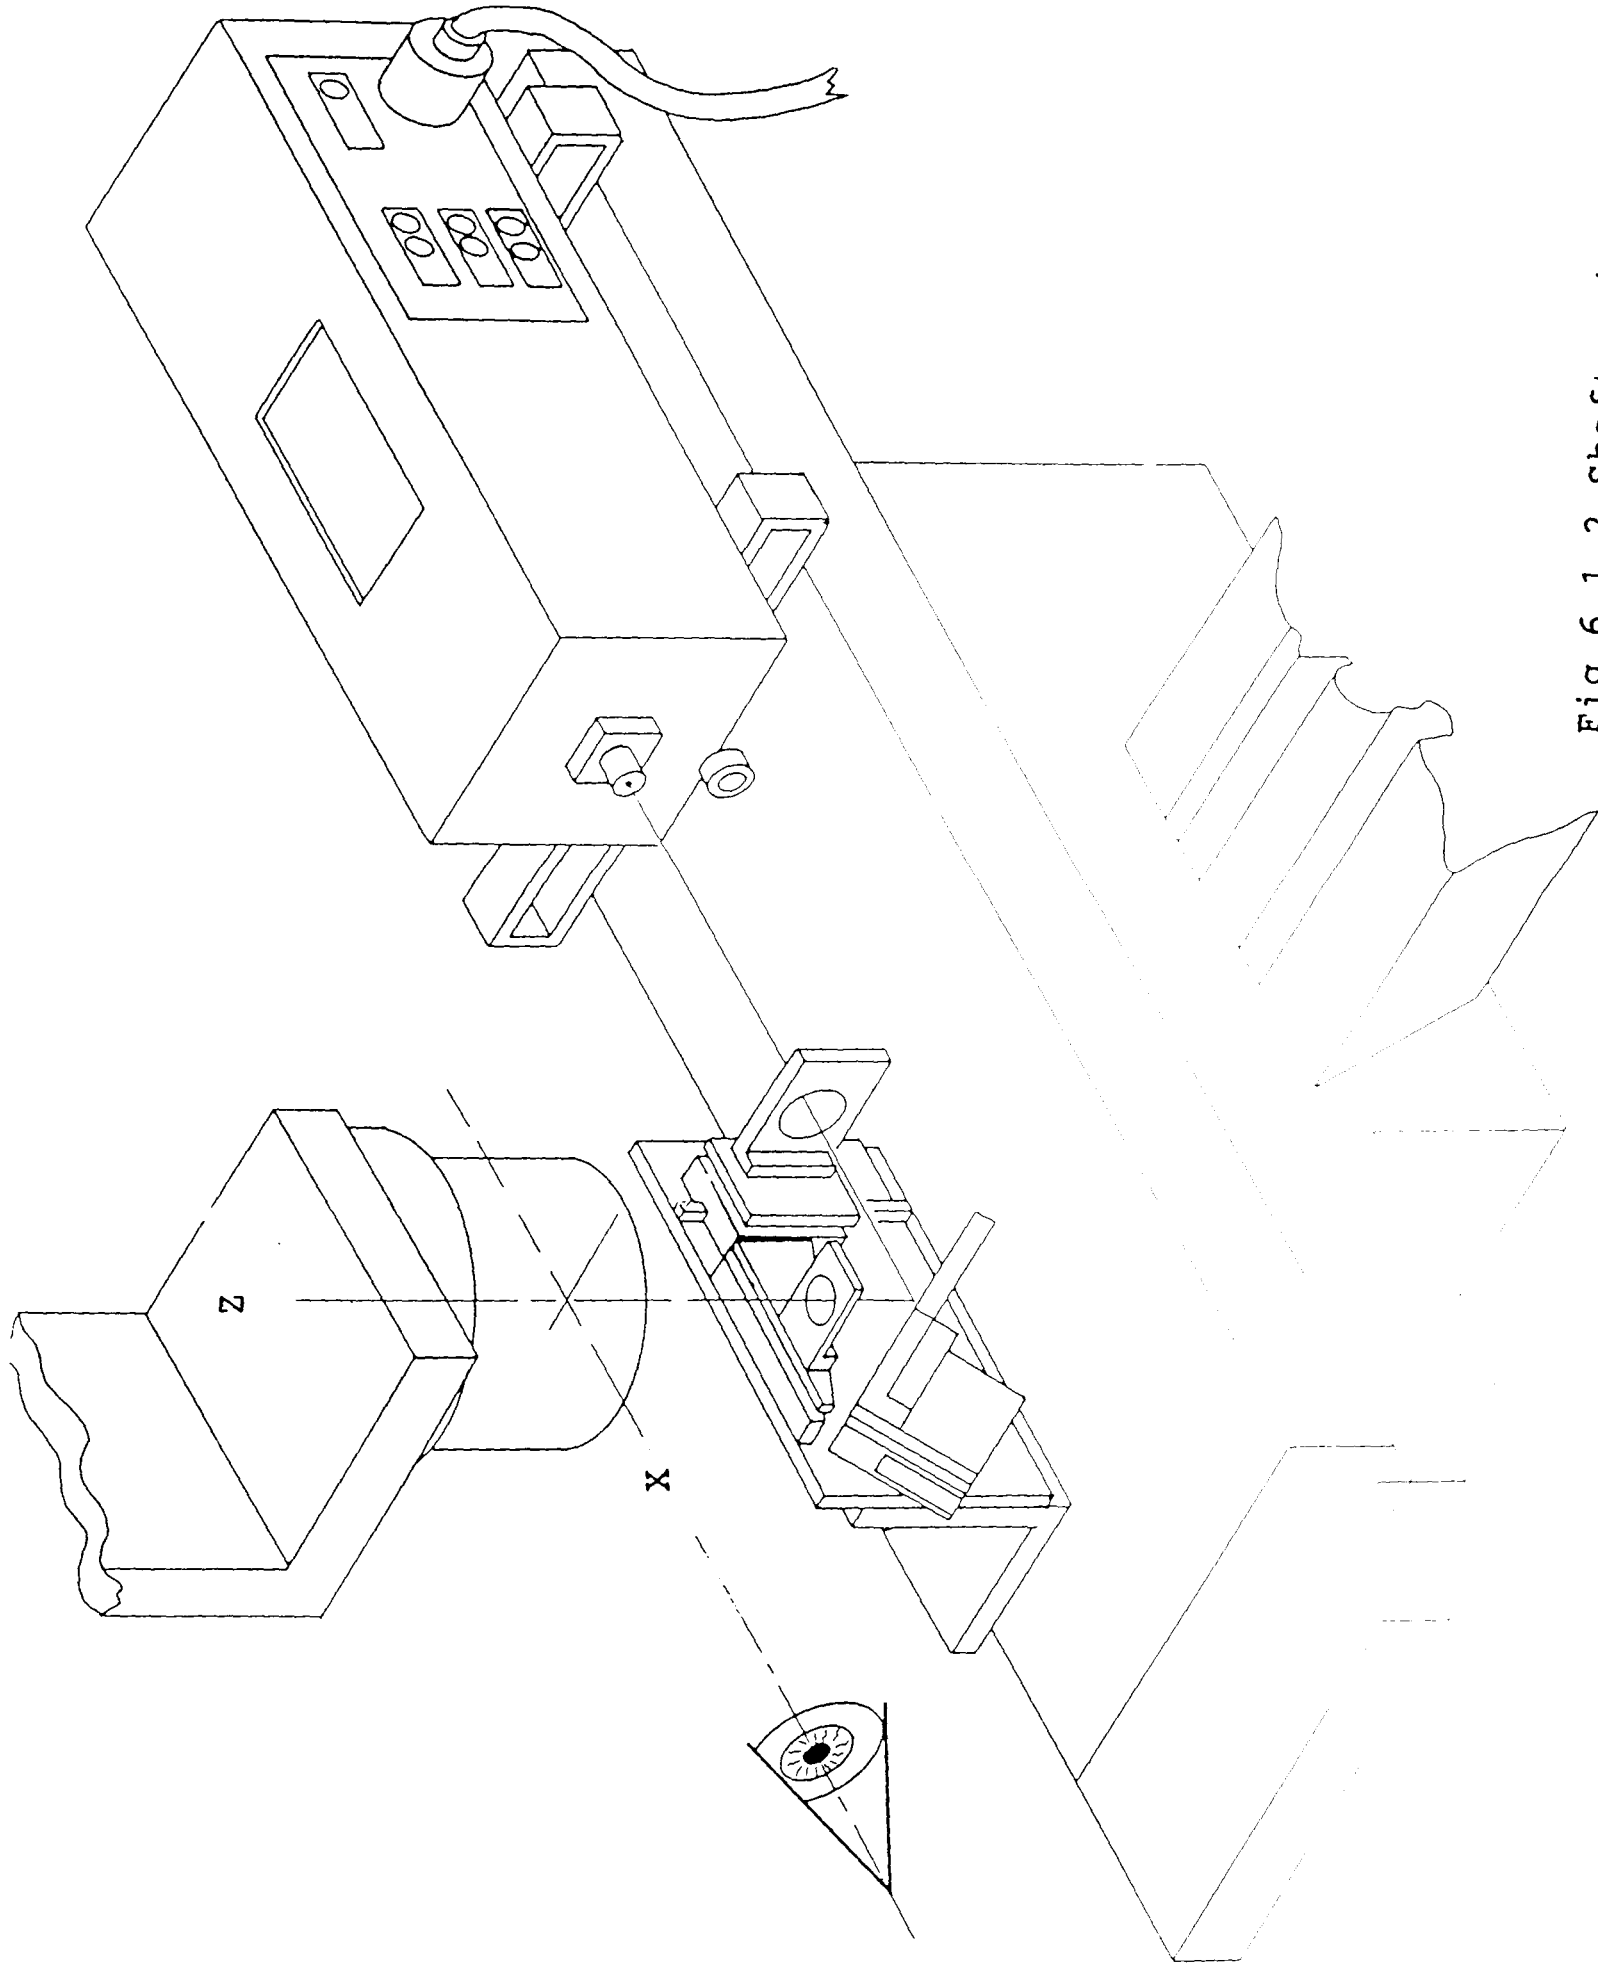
Shaft axis-laser beam axis alignment
